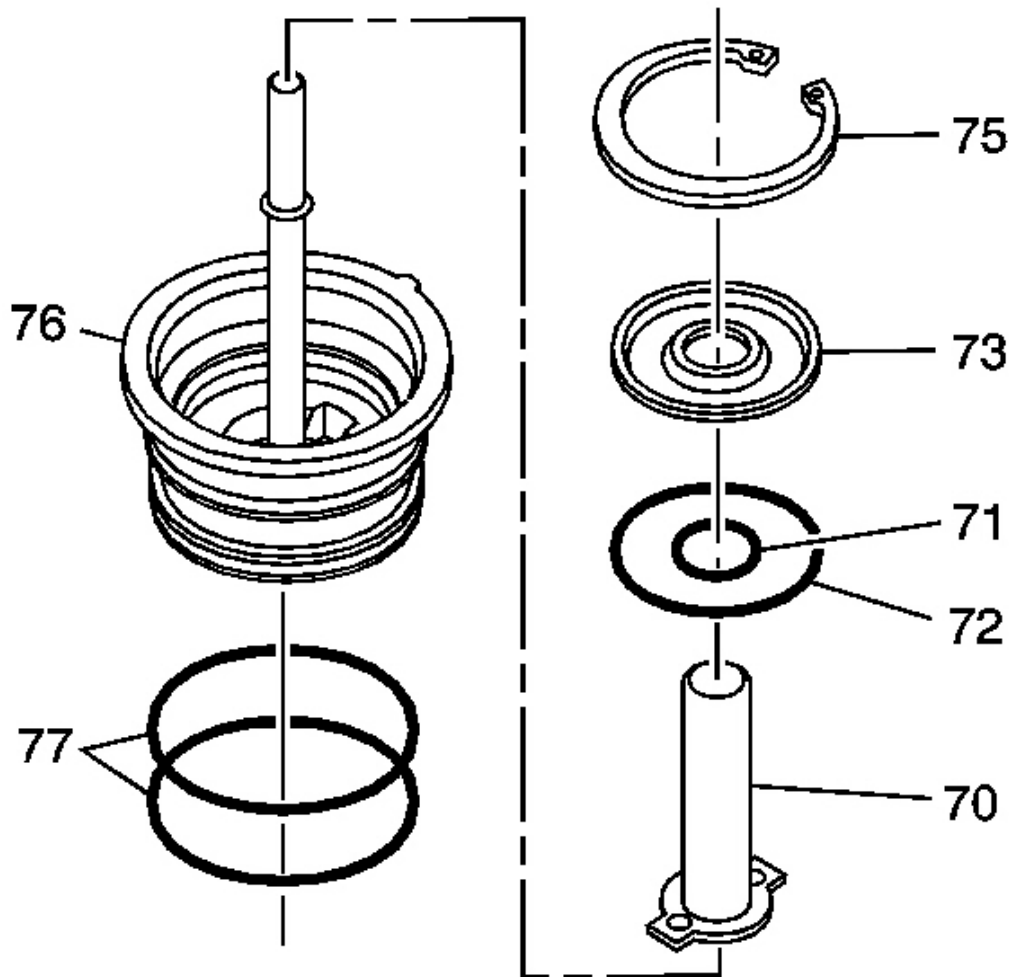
Coast Clutch Apply Fluid Pipe Guide Plate & Components Removed
